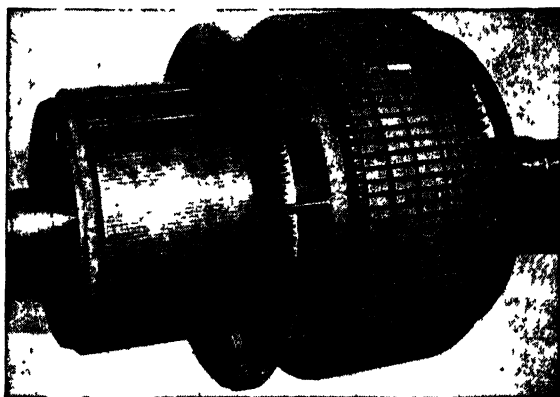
Completely assembled armature core and commutator for a large d-c machine.
